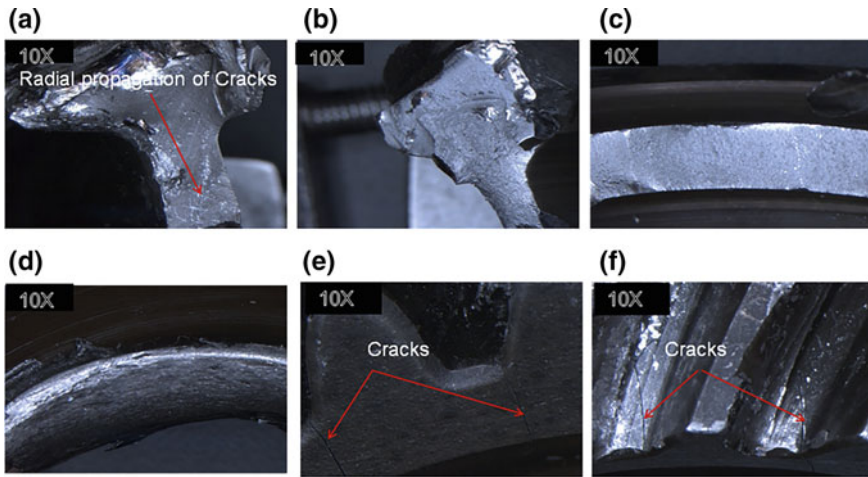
View of fracture surfaces of failed gear in various orientations a propagation of cracks along radial direction b view of fracture surface indicating brittle mode of failure c flat fracture surface near shaft/hub, d showing one of the damaged fracture surface near the hub/shaft area e cracks in the root web region and f cracks in the tooth profile
